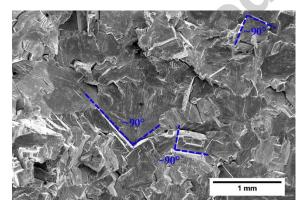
Fractography showing pure cleavage type fracture of the investigated sample. The blue dash lines indicate that an approximate angle of 90° can be found between the facets.
